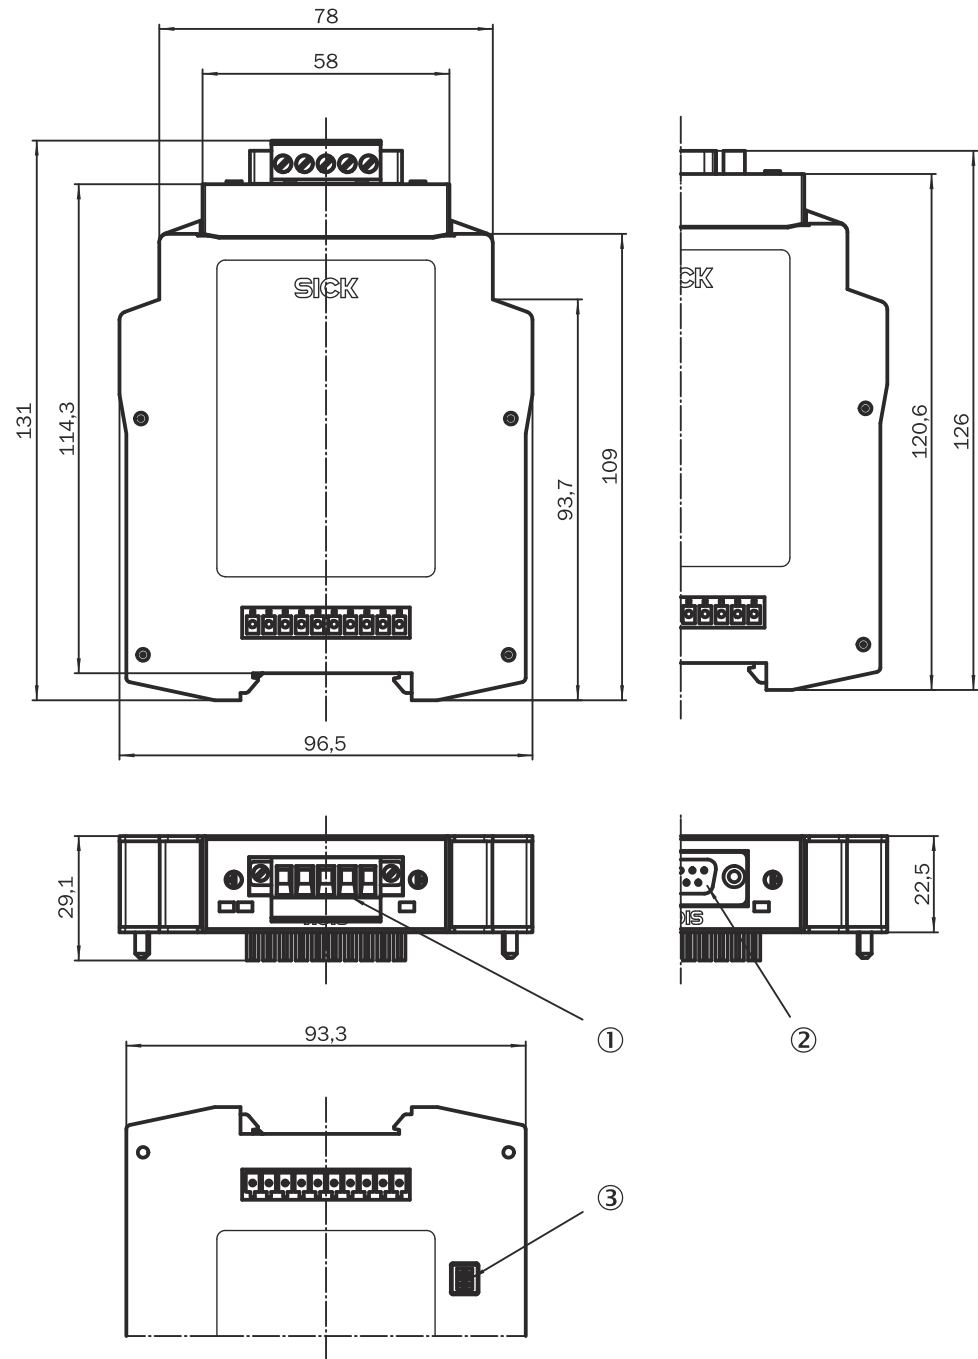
Dimensional drawing for FX0-GPRO, FX0-GCAN and FX0-GDEV (mm)
